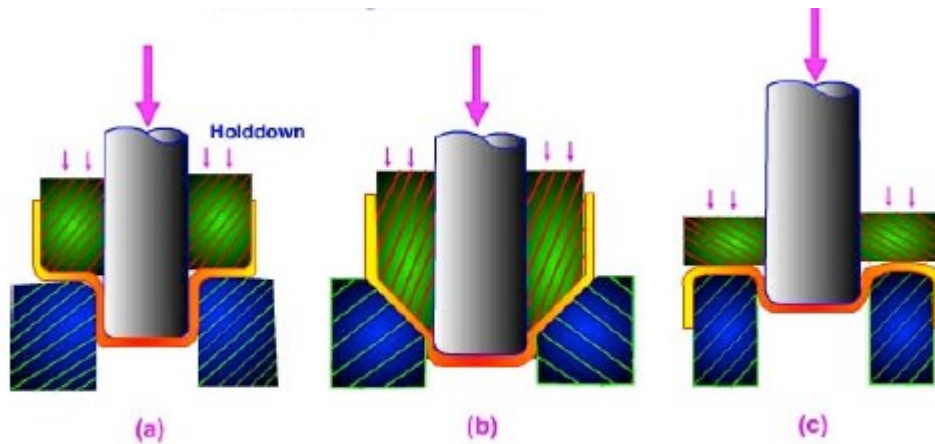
Redrawing methods (a) Direct redrawing (b) Direct redrawing with taper die (c) Reverse redrawing
